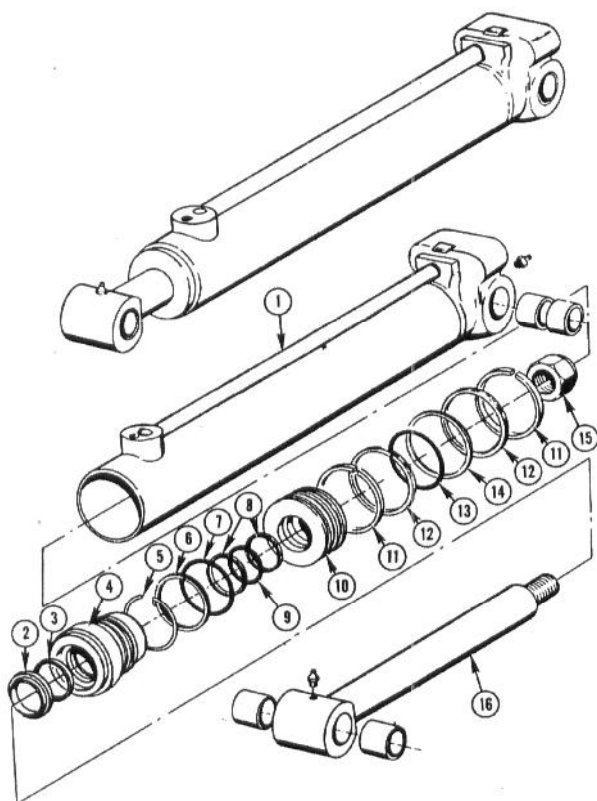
Identification of Parts Typical of MF Part No. 1605 020 M2
